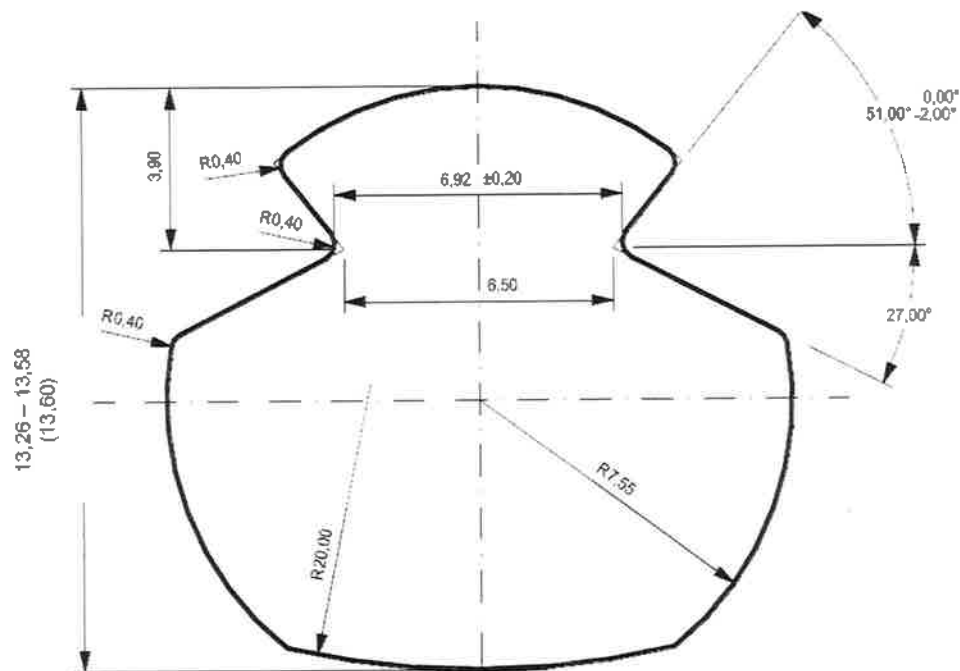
Configuration of BF-107 flat bottom contact wire
